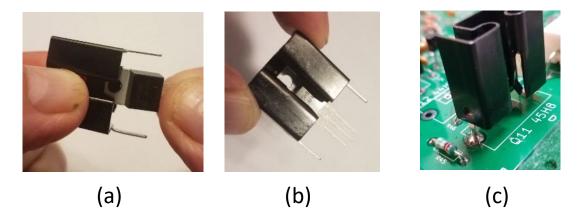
(a) Use your thumb to <u>slightly</u> spread the heat sink as you press the transistor into it. (b) Press the transistor into the heat sink until the holes in the heat sink and transistor line up. (c) Insert the transistor and heat sink into the PCB so the transistor leads and heat sink tabs fit easily into the PCB. Then make one solder joint on the top of the board to keep the component from falling out. Finally, turn the board over and solder the rest of the leads and the heat sink tabs
